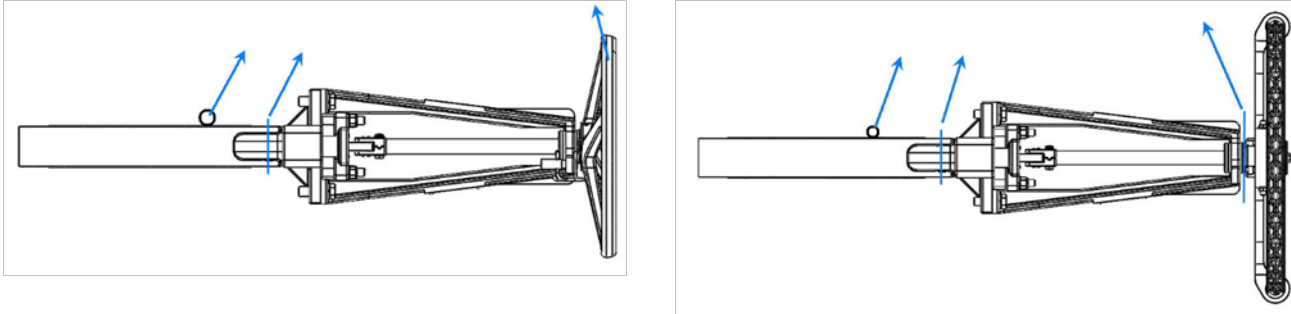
, Knife Gate Valve with Handwheel or Chainwheel Actuator, Horizontal Lifting
